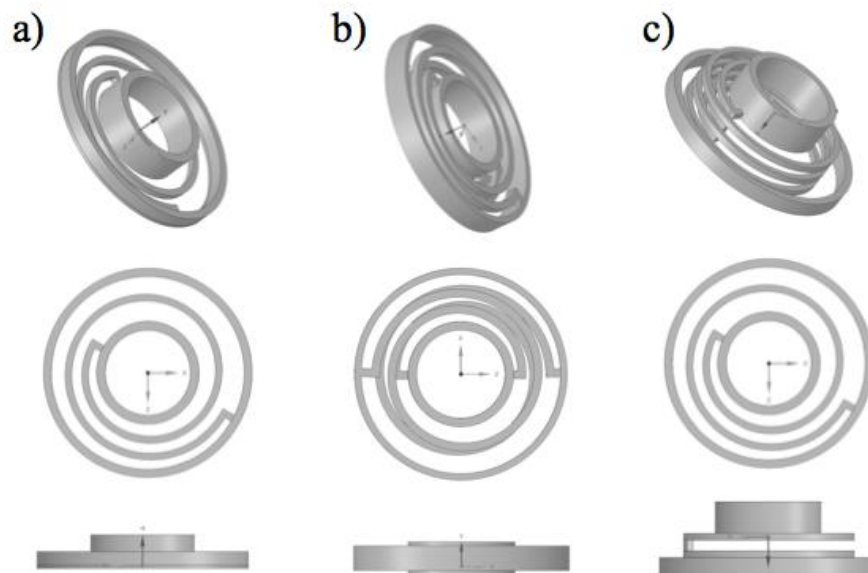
Focus adjusting lens actuator designs a) one-side fixed b) two-sides fixed c) multi-layered.
